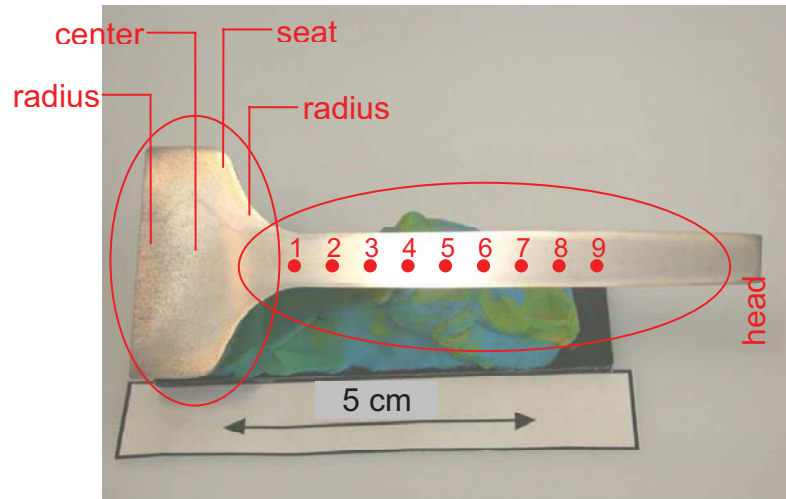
The investigated positions are indicated by 1 to 9 on a forged valve blank section.
